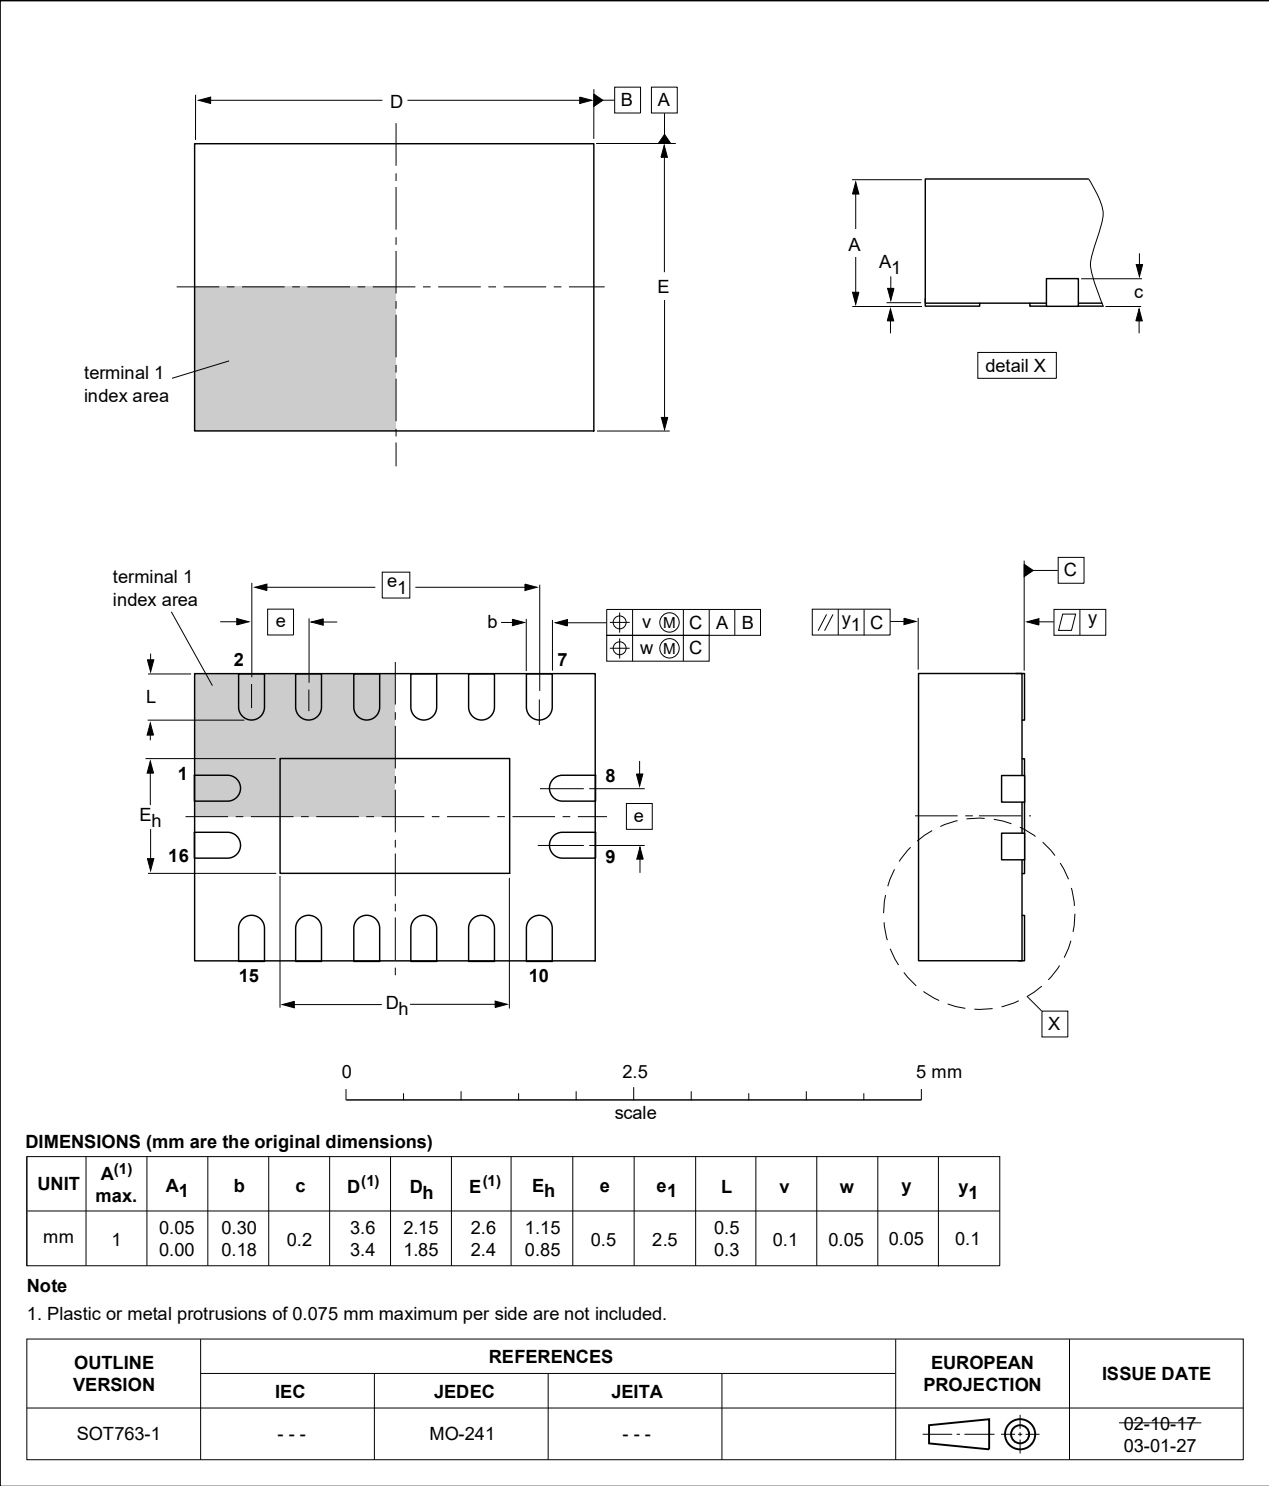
Package outline SOT763-1 (DHVQFN16)
